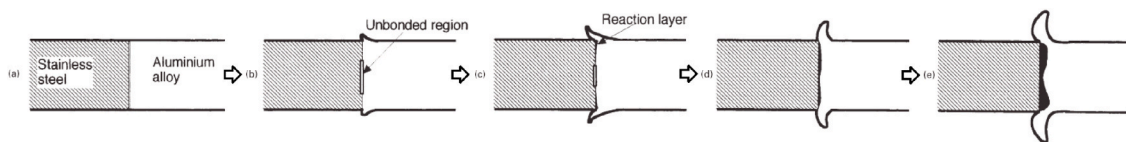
Reaction layer formation steps in dissimilar Al-steel friction welding [6].
